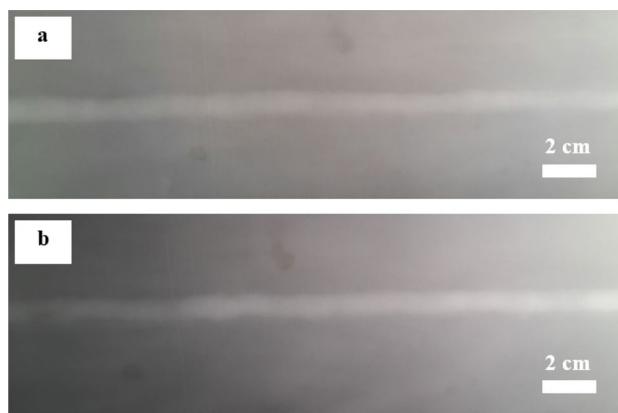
Radiographic X-ray films of the 316L/ER316LN (a) and 316L/ER308LN (b) welded joints showing the absence of defects
